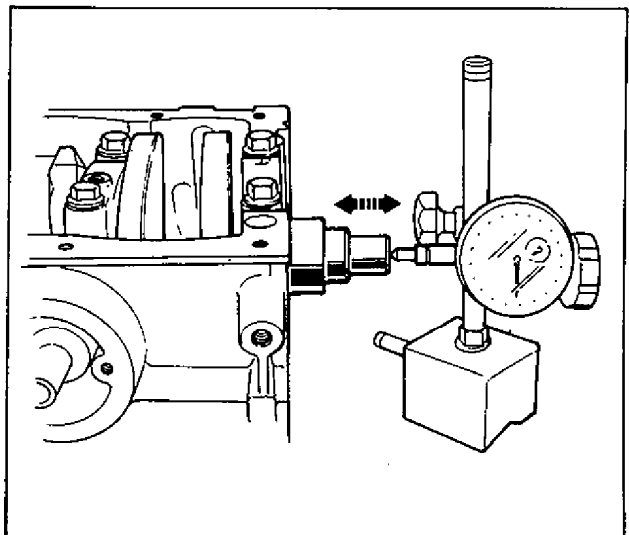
A-137 Measuring Thrust Play of Crankshaft
